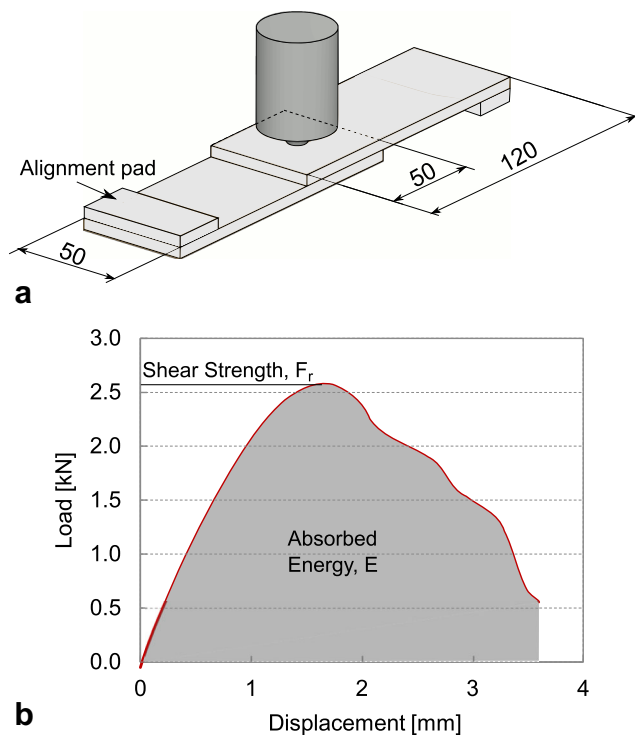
a Schematic of shear test specimen and b mechanical characteristics of FSS welds during shear tests
